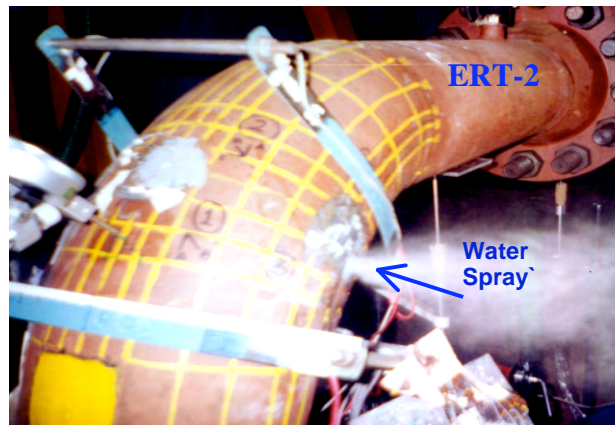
Axial through wall crack with water spray in ERT2 pipe-elbow assembly
